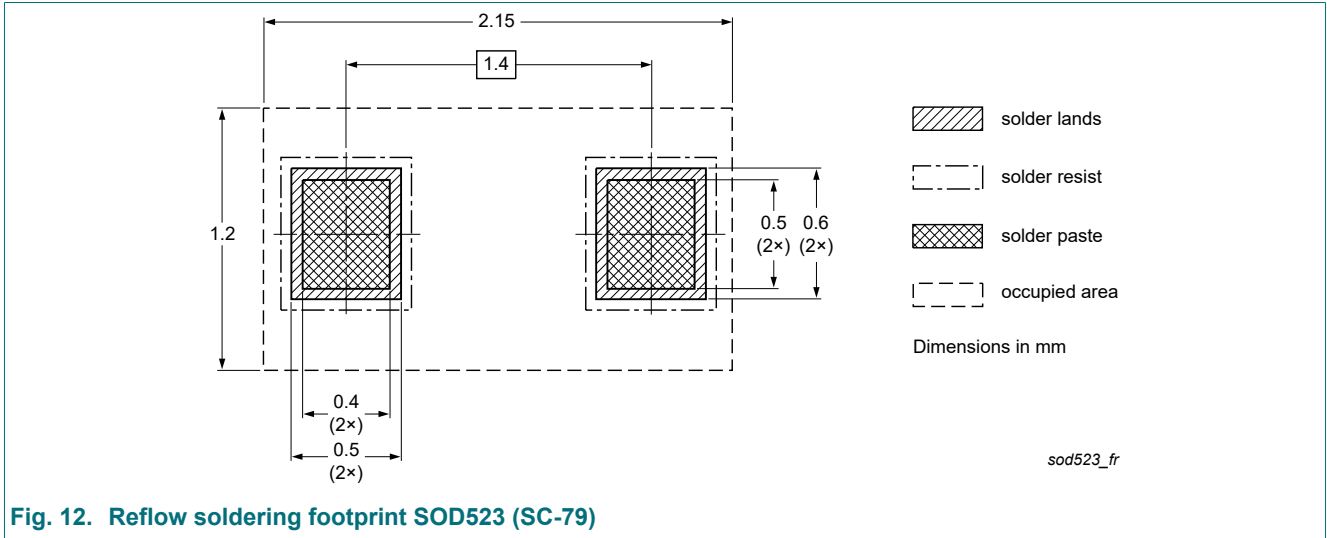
Reflow soldering footprint SOD523 (SC-79)
